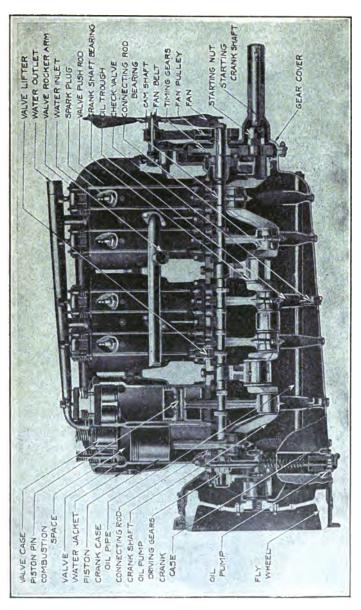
Part Sectional View of the Buick Six Cylinder Overhead Valve Motor, Depicting Important Parts.
